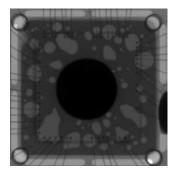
Photo of Solder Paste Remains due to Inadequate Reflow Profile (Radio IC Removed)
